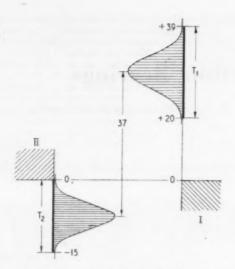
Diagram showing tolerances for shaft (I) with diameter 60 n6 and bearing inner ring (II)
